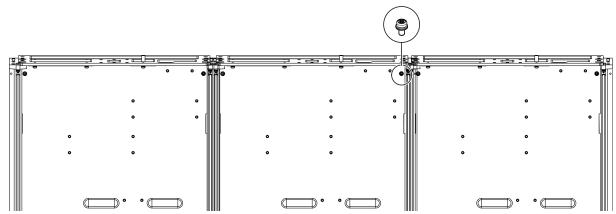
Removing a #1 Phillips screw from the chassis in which an Ethernet switch will be installed (cable harnesses, PSUs, and switch not shown)
